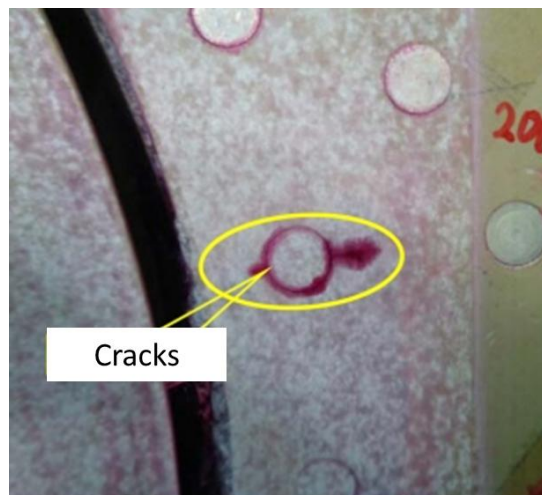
Cracks of full-scale fatigue test at the skin rivet holes in the door opening corner
